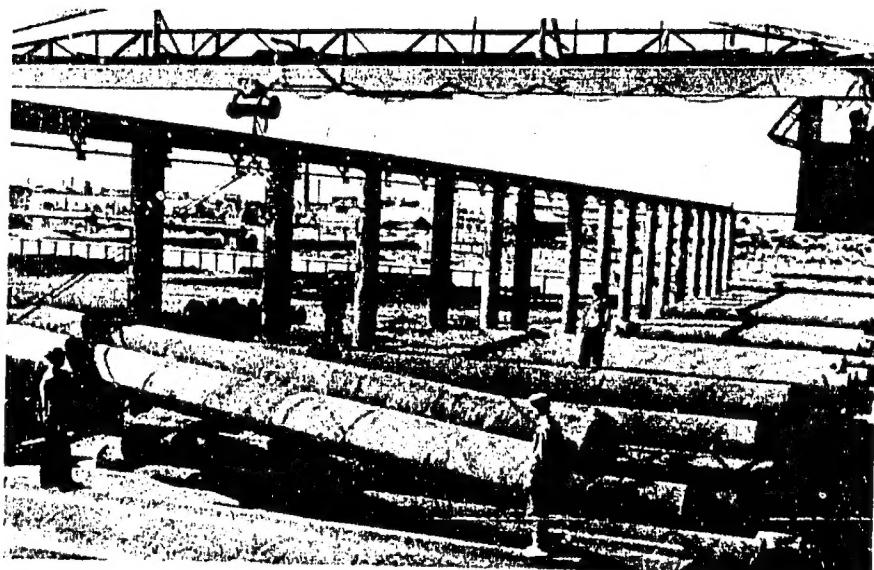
Steel pipe made by the Kirin Tubing Mill.
